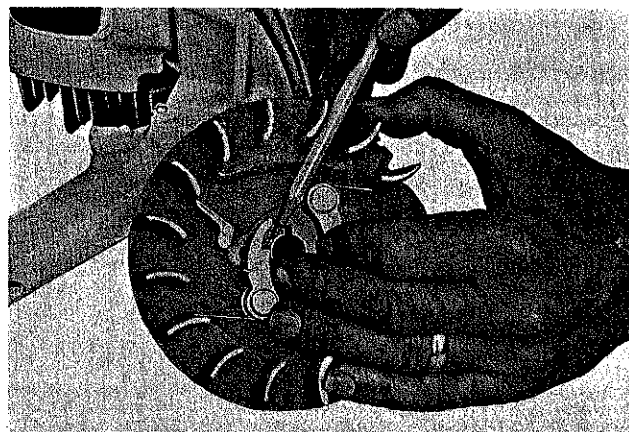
Checking the condition of the starter pawls, pawl springs, and the flywheel vanes.
